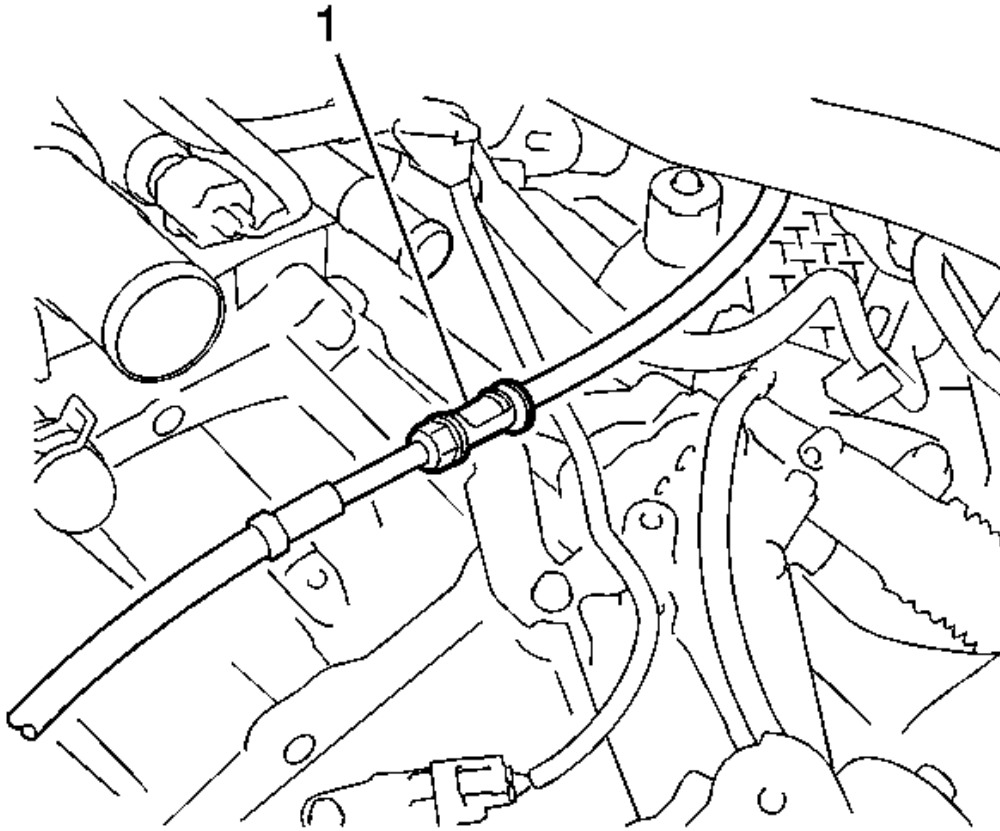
Identifying Automatic Transmission Shift Control Cable
